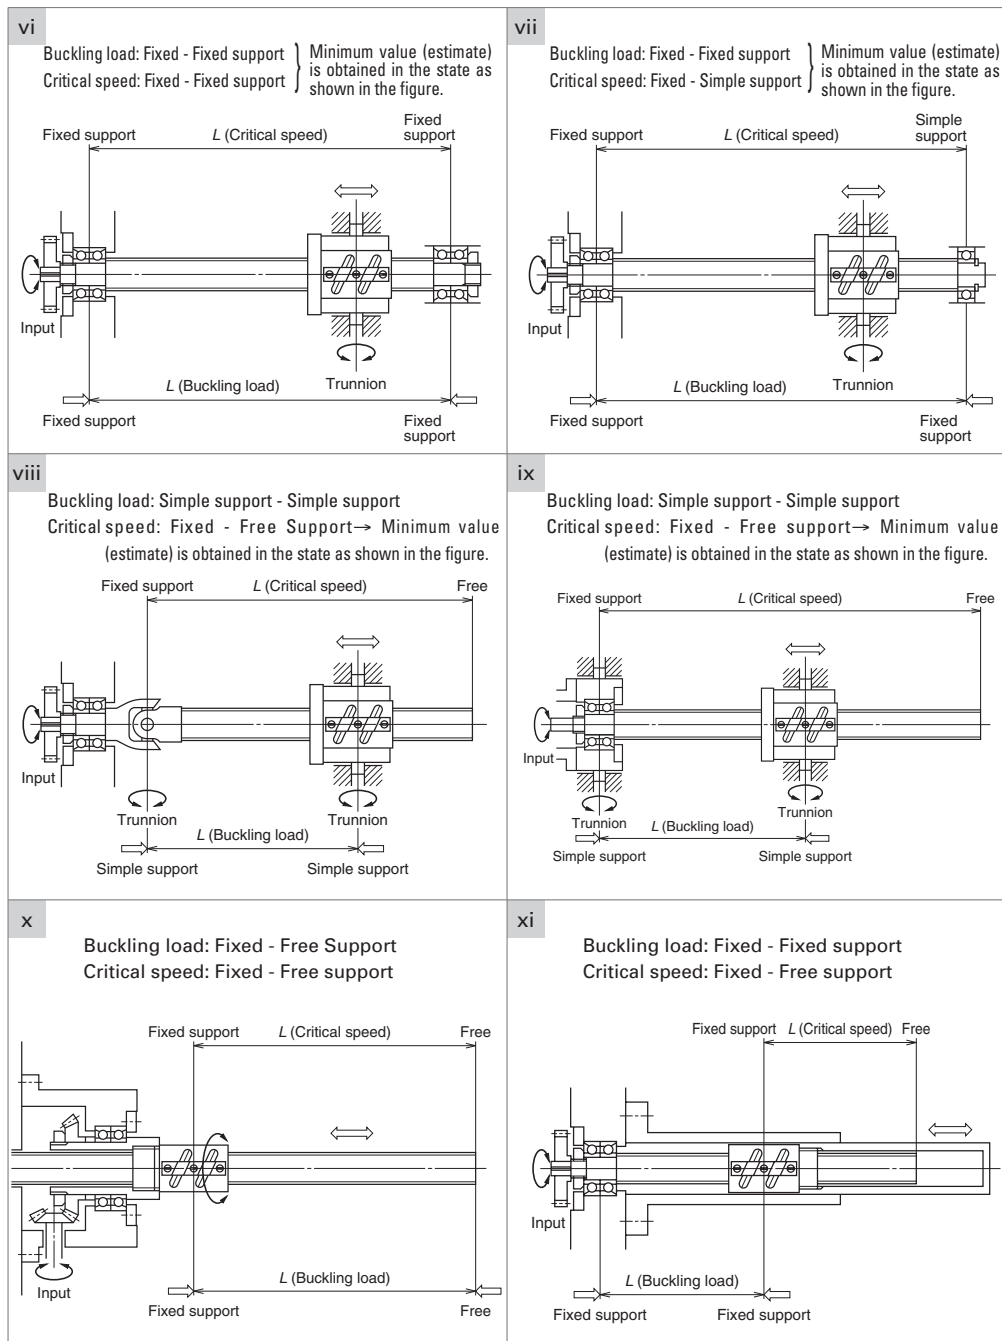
Supporting conditions of screw shaft and ball nut w
